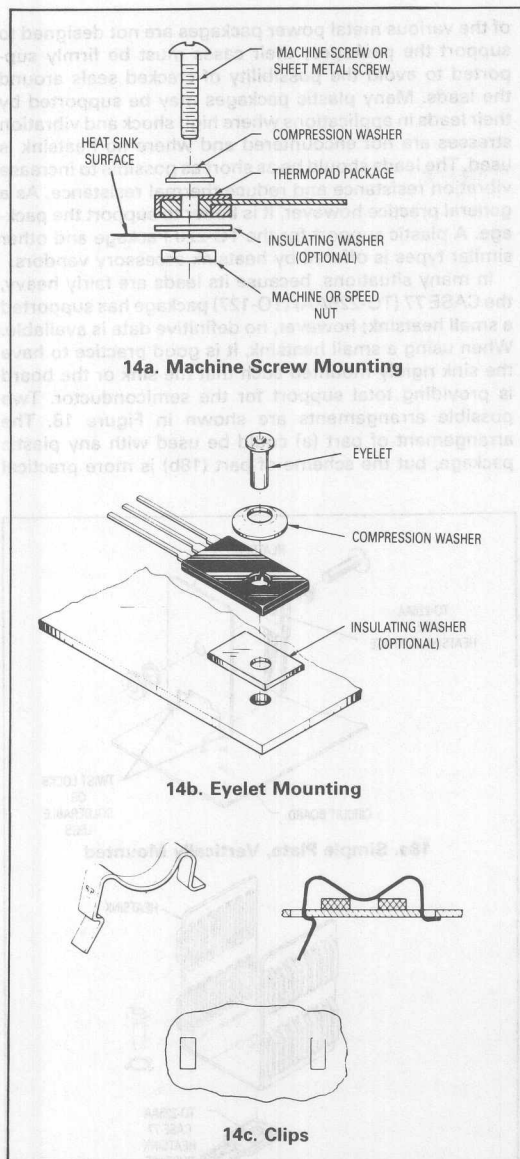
Recommended Mounting Arrangements for TO-225AA (TO-126) Thermopad Packages
